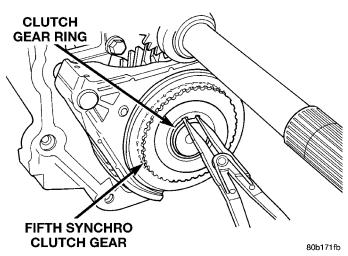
Fifth Gear Clutch Gear Snap Ring
